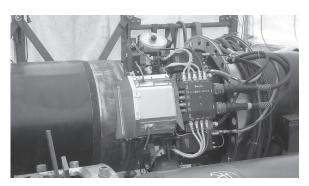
Appearance of welding on onshore pipeline construction
